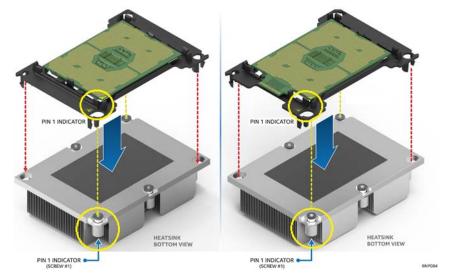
Processor Clip Sub-assembly to Heat Sink Orientation
